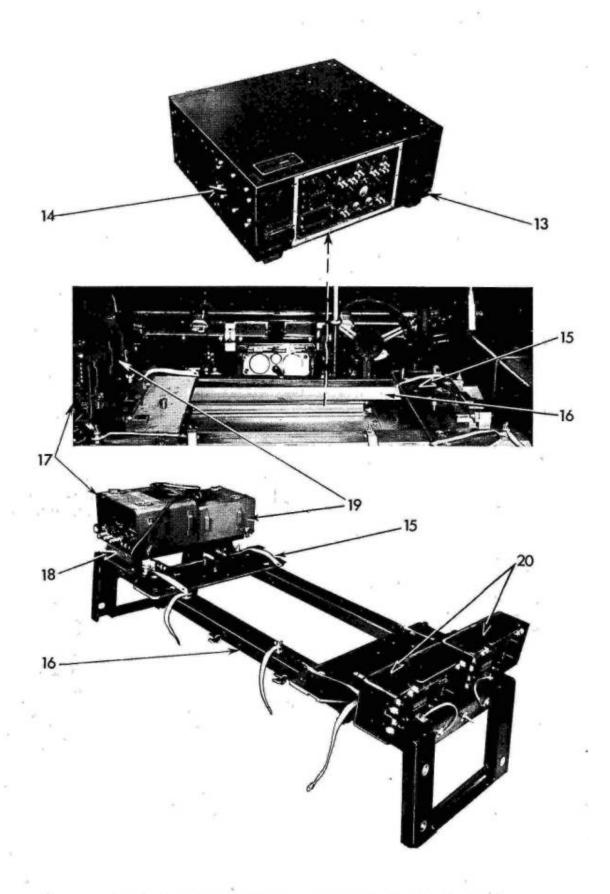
DISMOUNTING EQUIPMENT STAGE TWO
